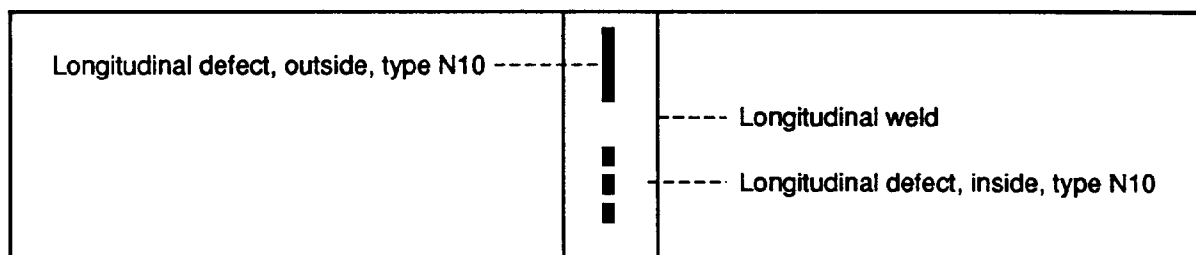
FIGURE D TEST PIPE OR SECTION FOR HFW PIPE
